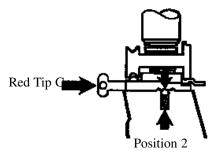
The Wing Nut and Top Jaw of the vise removed to show a top view of the Bottom Jaw only, for key positioning and Tip Stop settings.
